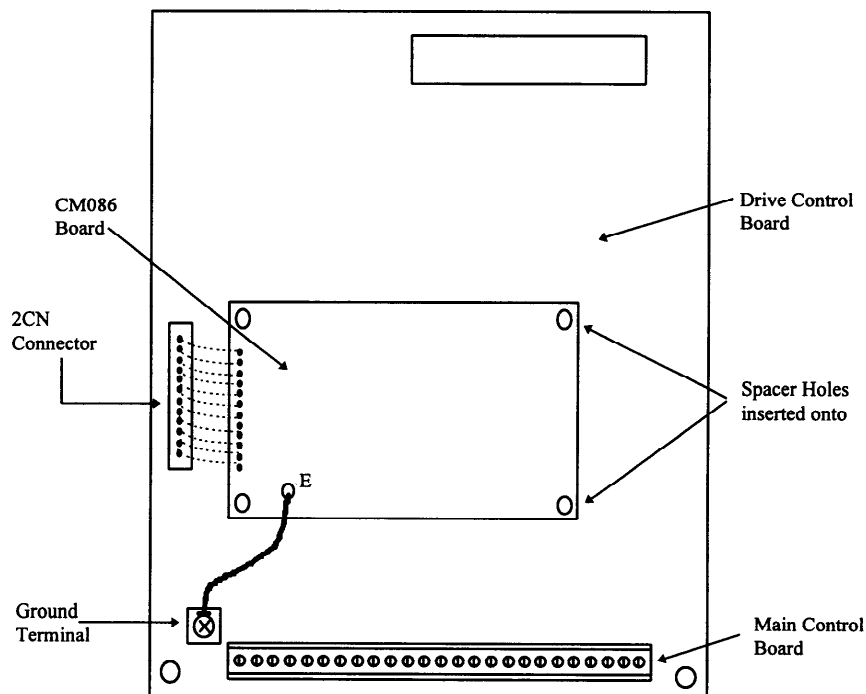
Position of the CM086 Board on the GPD 506 Drive
